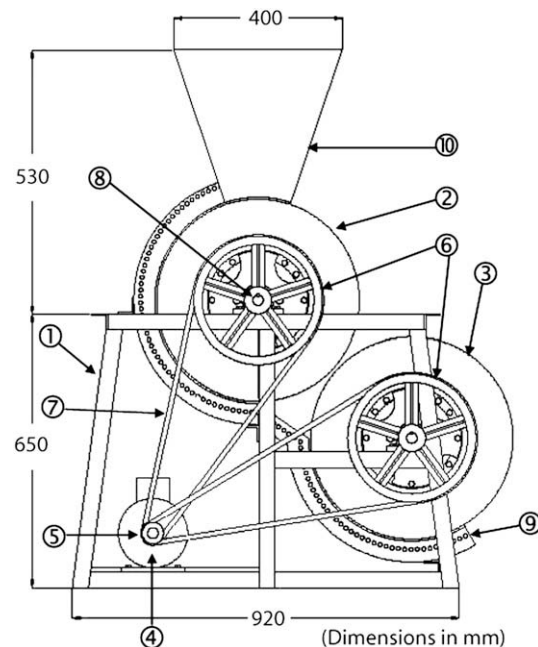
Schematic diagram of dry betel nut fruit husking machine. (1 = Frame; 2 = First tyre; 3 = Second tyre; 4 = 220 V 50 Hz 1 Phase 2.2 kW Electric motor; 5 = Driving pulley; 6 = Following pulley; 7 = V-belt; 8 = 25.4 mm Axial shaft; 9 = Steel concave sieve; 10 = Hopper).
